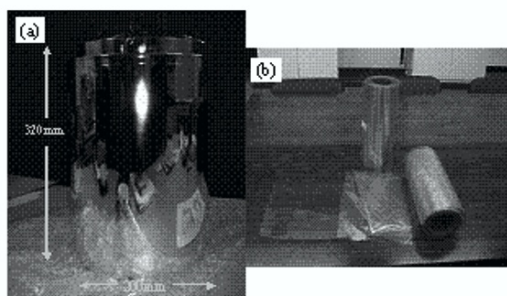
(a): Seamless roll mold for a moth-eye surface.
